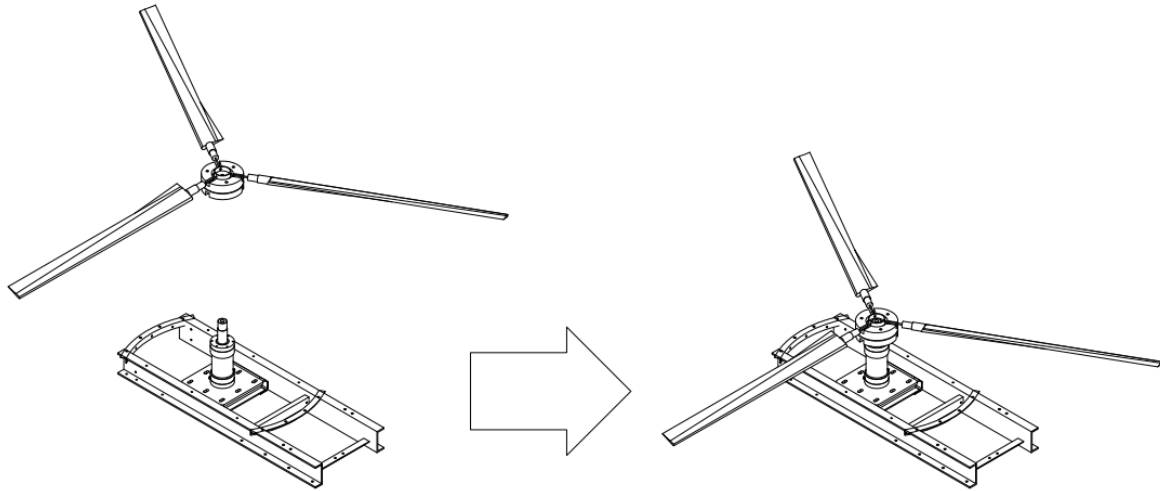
Fan Blade Assembly on Shaft Shoulder
